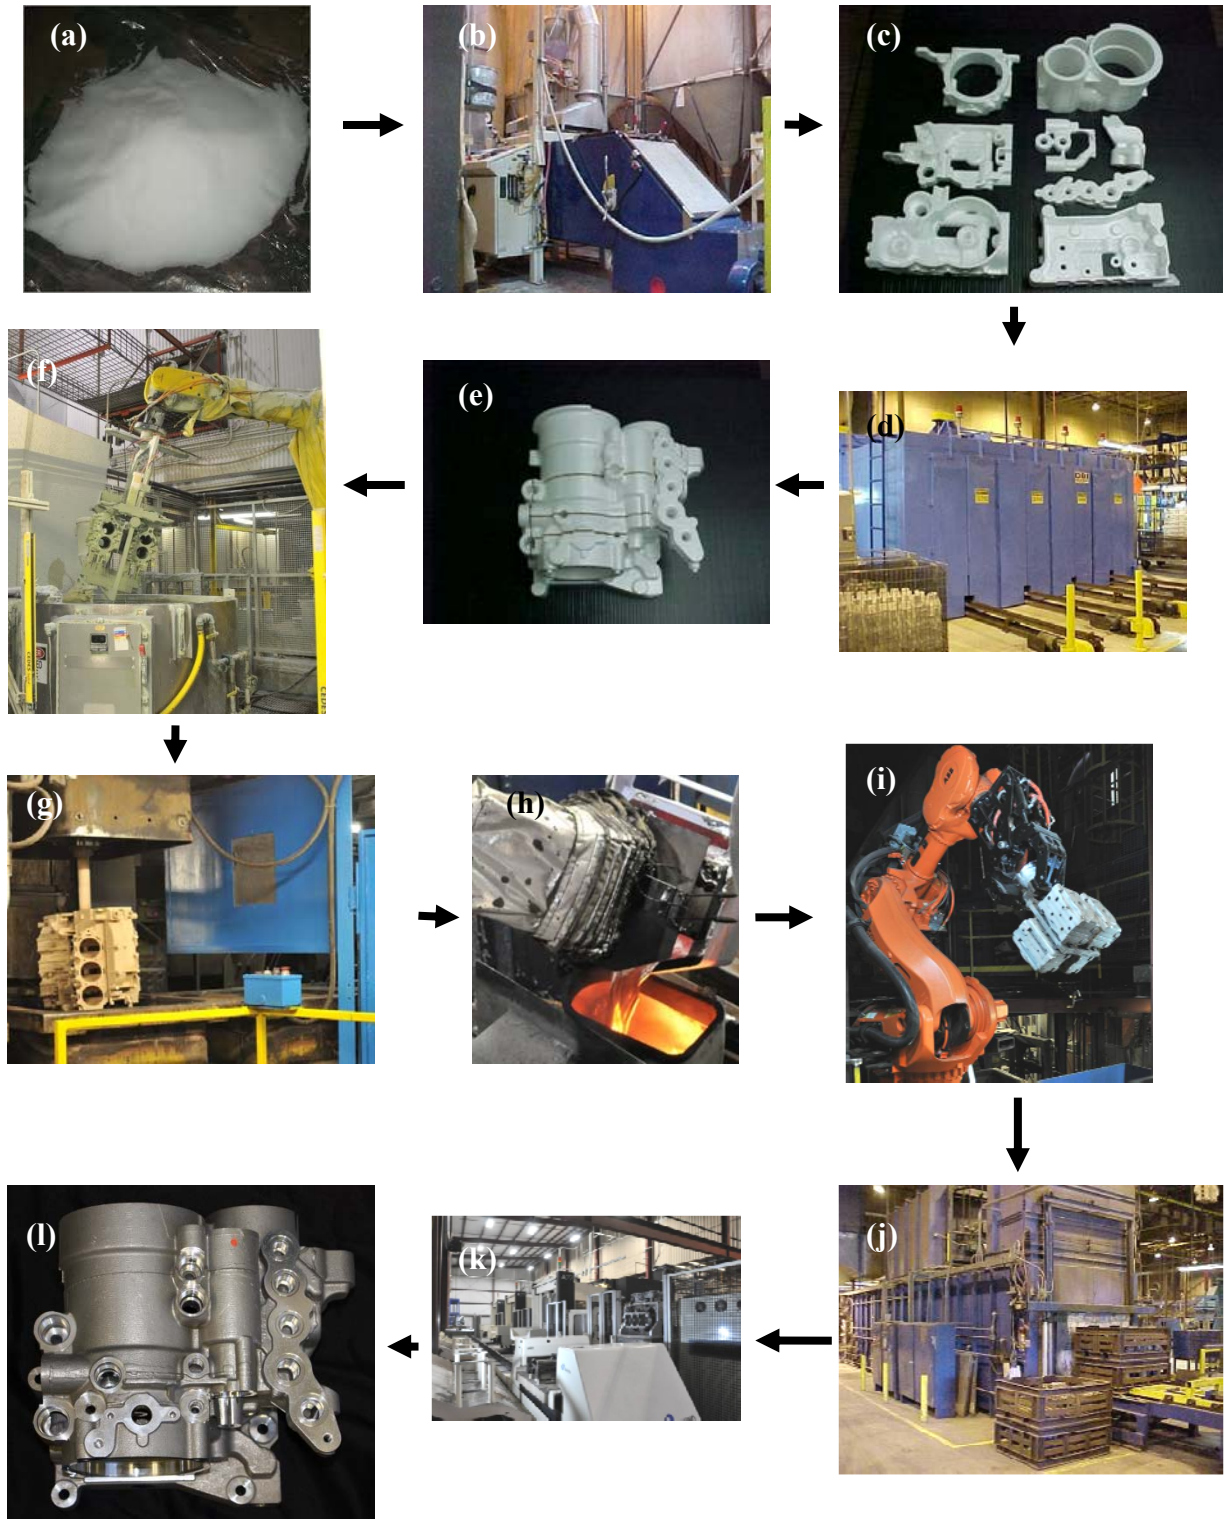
Schematic of lost foam casting process at BRP-Spruce Pine. (a): raw polystyrene bead, (b): pre-expansion; (c): pattern molding; (d): pattern drying; (e): pattern assembly; (f): pattern coating; (g): placement in flask and sand fill; (h): pouring; (i): shakeout; (j): heat treatment; (k): machining; (l): finished casting. The casting shown in (c), (e), and (l), a fuel filter housing for a heavy truck, was awarded "Best in Class" in the 2010 AFS Casting of the Year competition.
